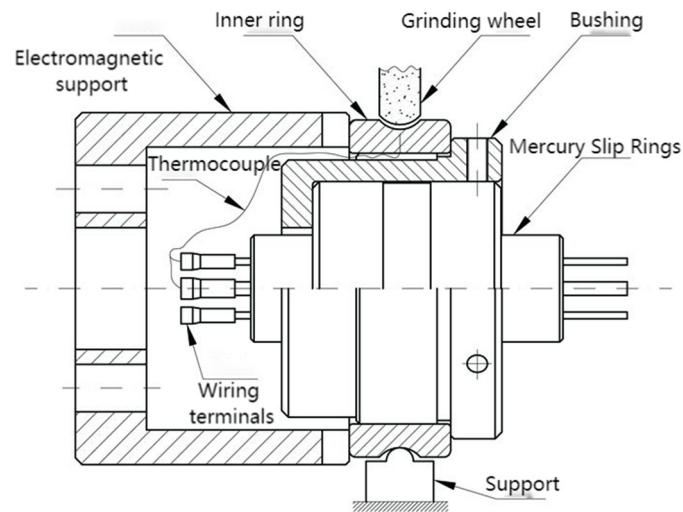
Bearing inner ring raceway grinding temperature measurement scheme assembly diagram.
